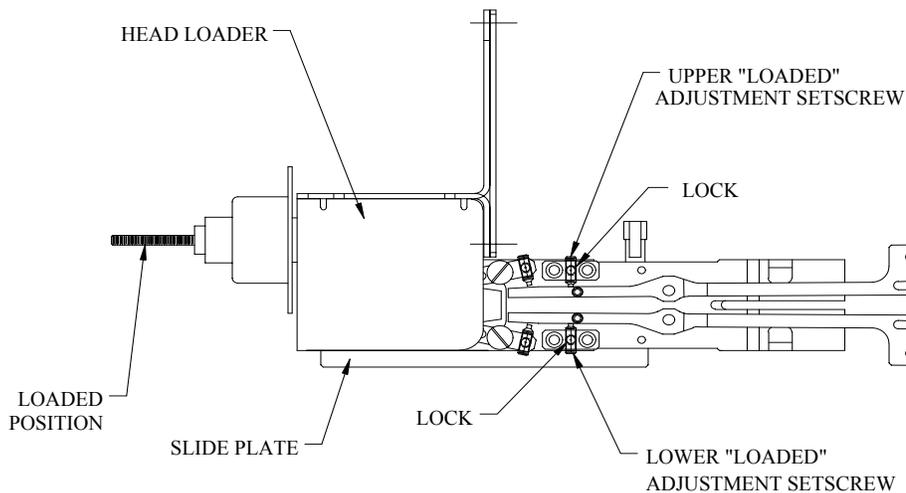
Head Loading Mechanism “Loaded” Adjustment
